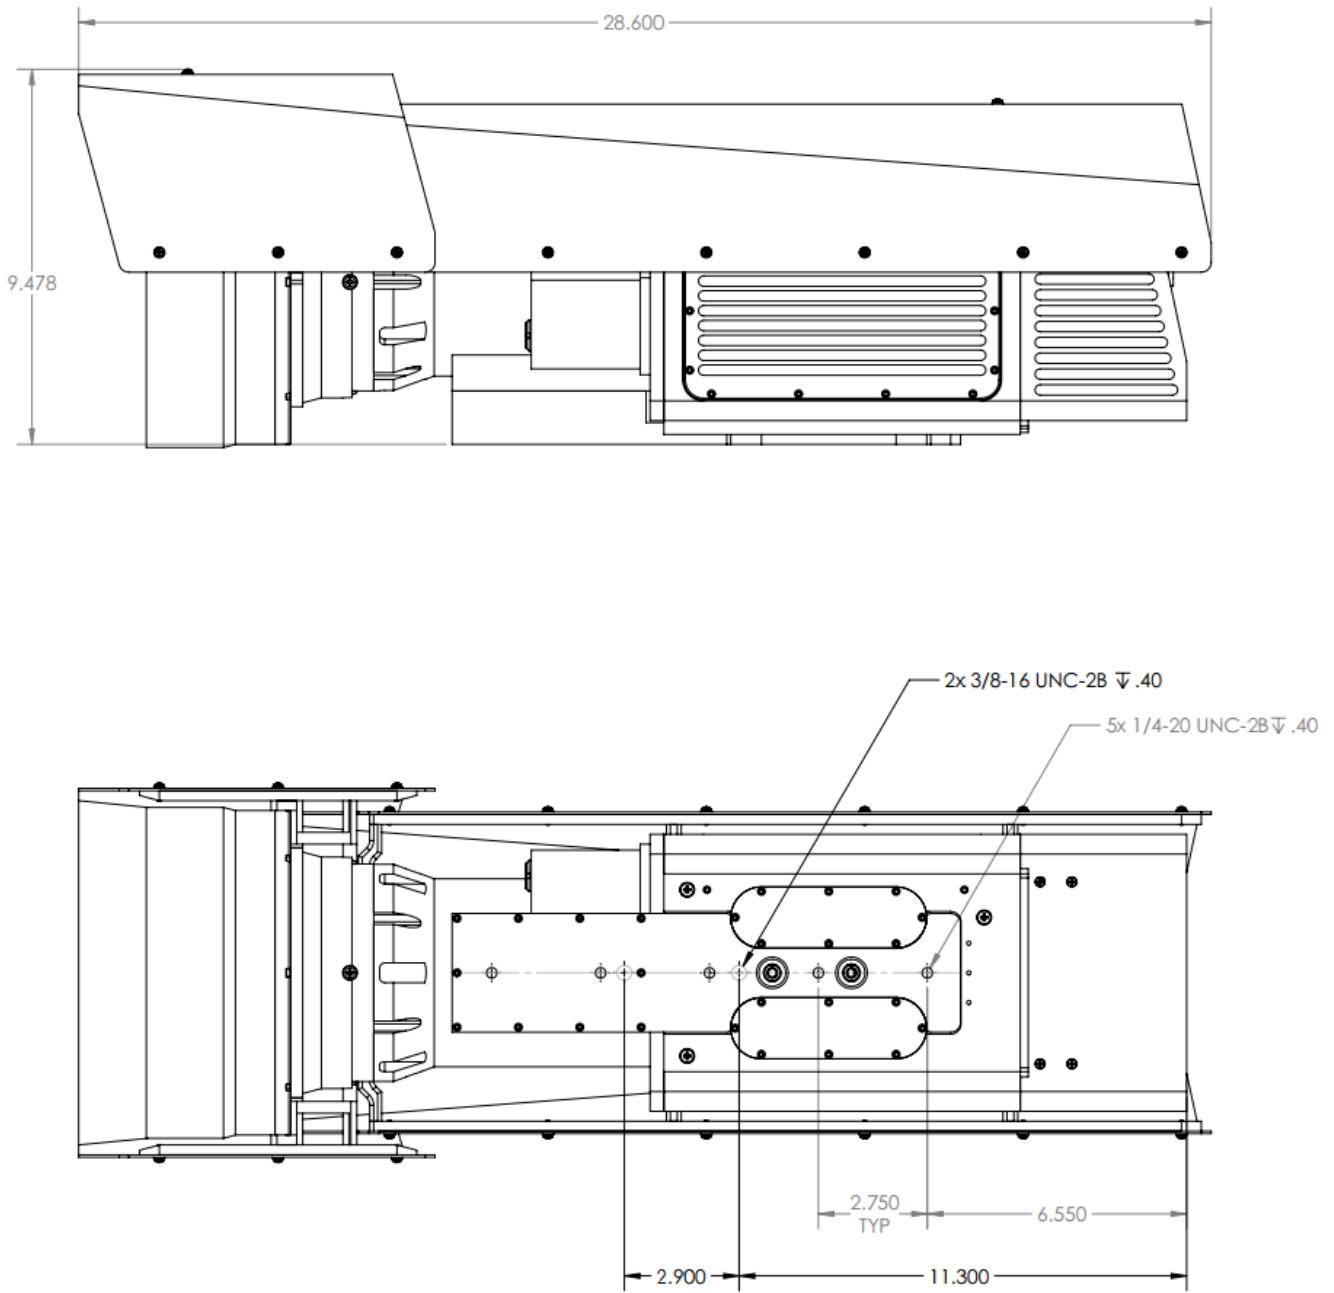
Side and bottom view of RS6780 (base zoom)
